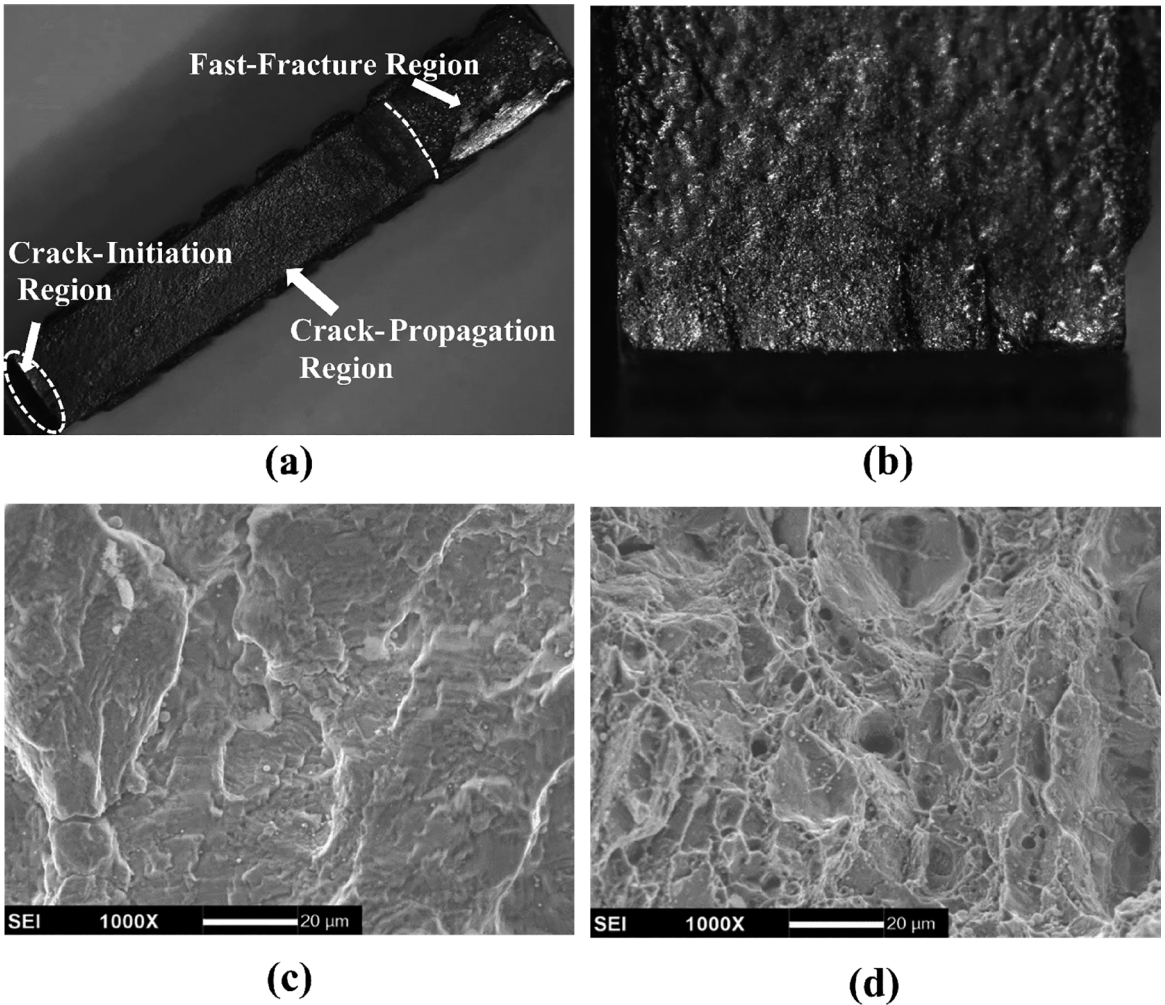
(a) Overall fatigue fracture surface of the specimen 2; (b) crack initiation region; (c) crack-propagation; (d) fast-fracture region.
